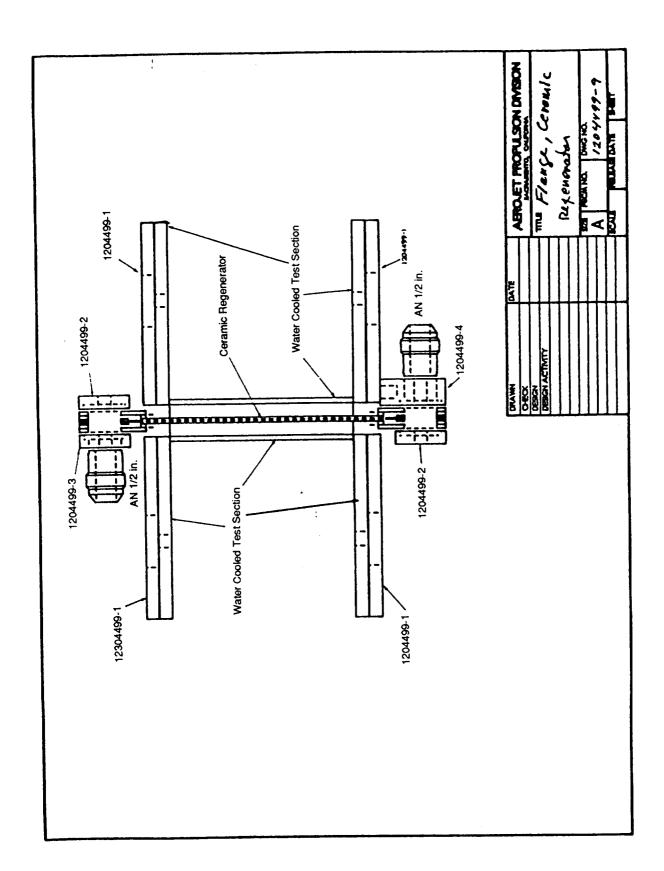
Sketch of Test Section With Vane and Flanges Exploded in Place
